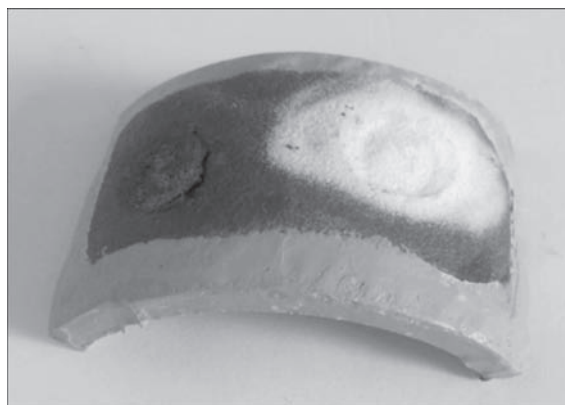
Specimen with defect of enamel coating after restoration using MPS method and uniformity testing
